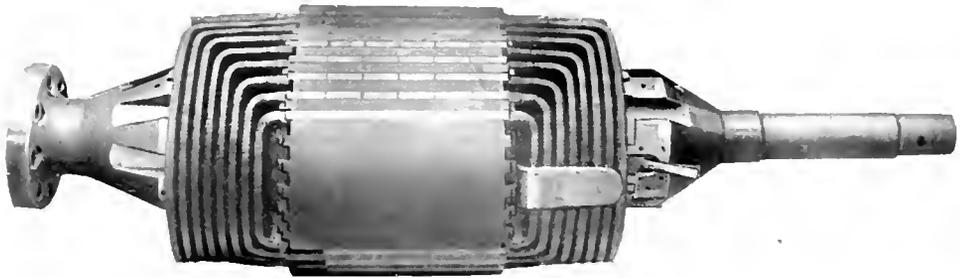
Rotor of Two-Pole Turbine-Driven Alternator, Showing Field Coils Assembled in Core
